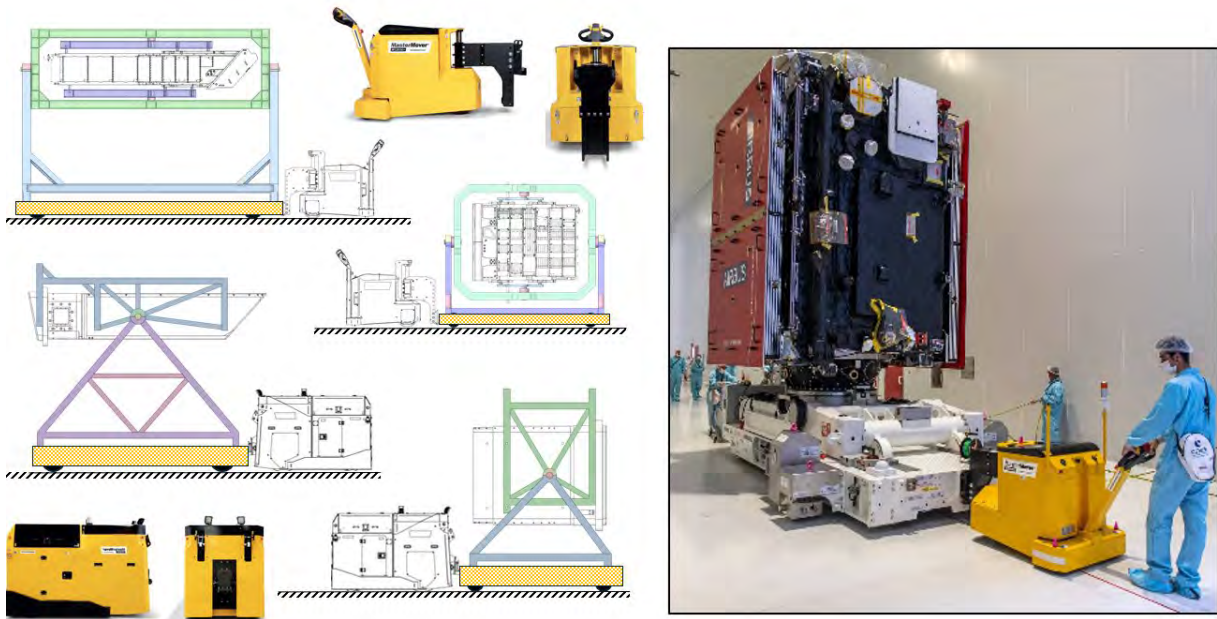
Examples of heavy component transfer systems using custom handling tools mounted on platform bases and towed by cleanroom-compatible tractor heads.
